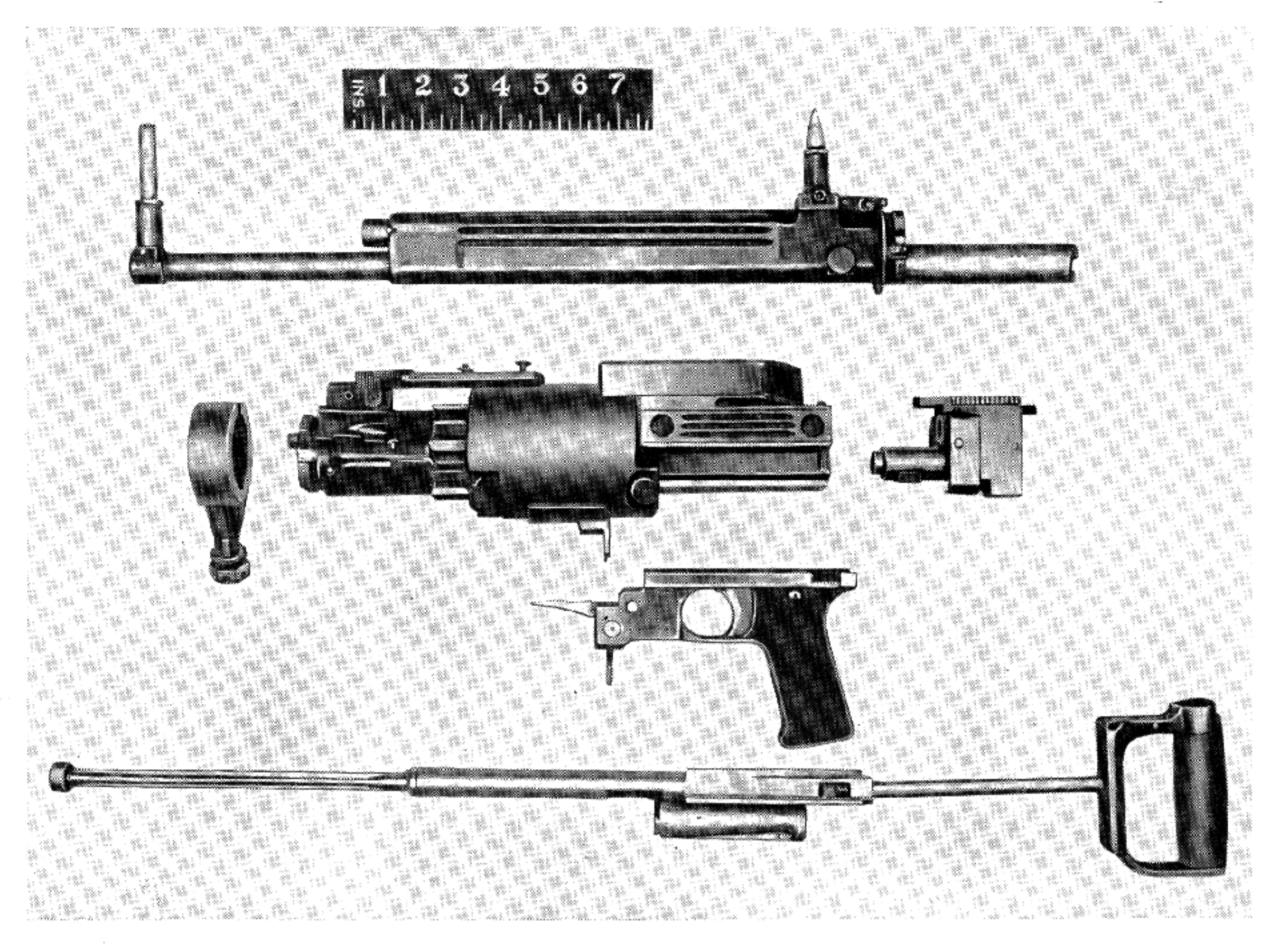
7.62-mm Shkas Flexible Machine Gun, field stripped,
